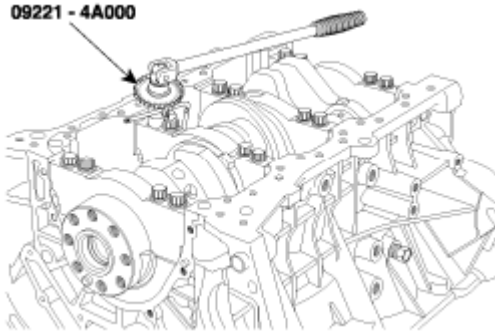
Installing Main Bearing Cap Bolts Using SST
